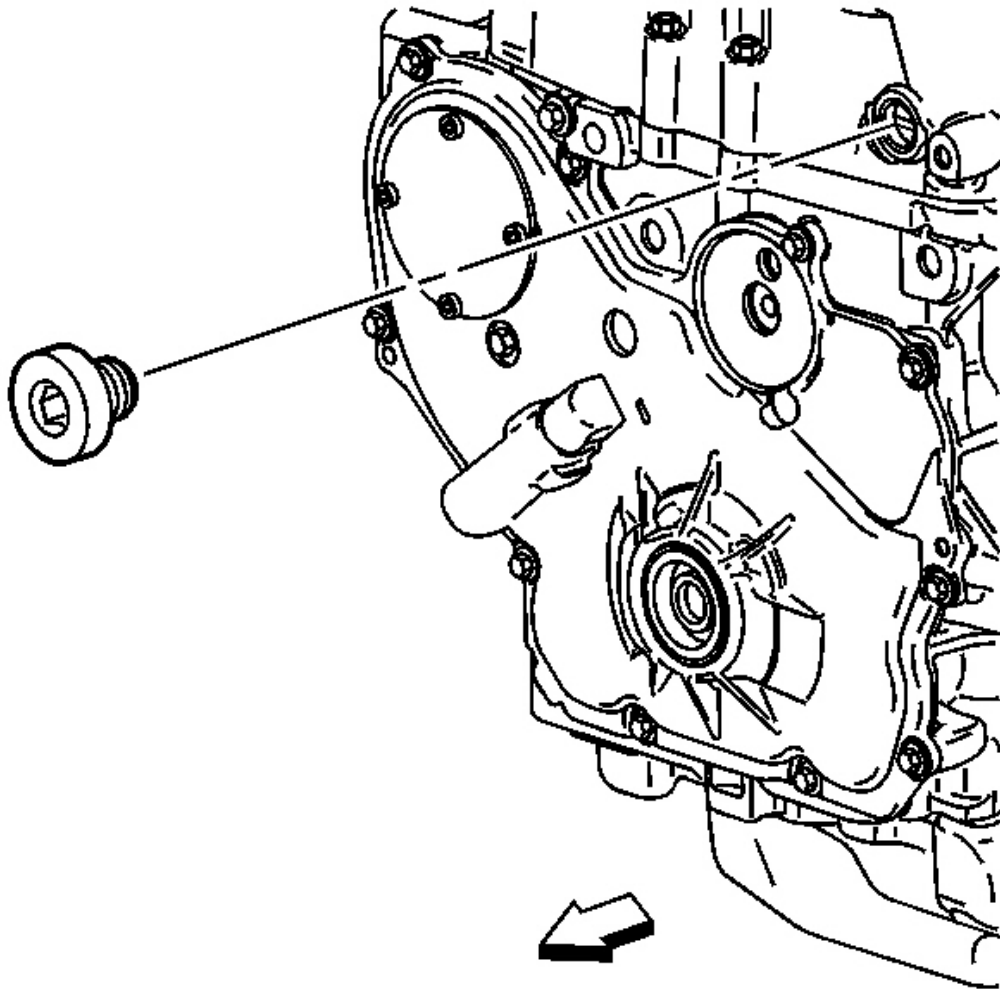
View Of Fixed Timing Chain Guide Access Plug
